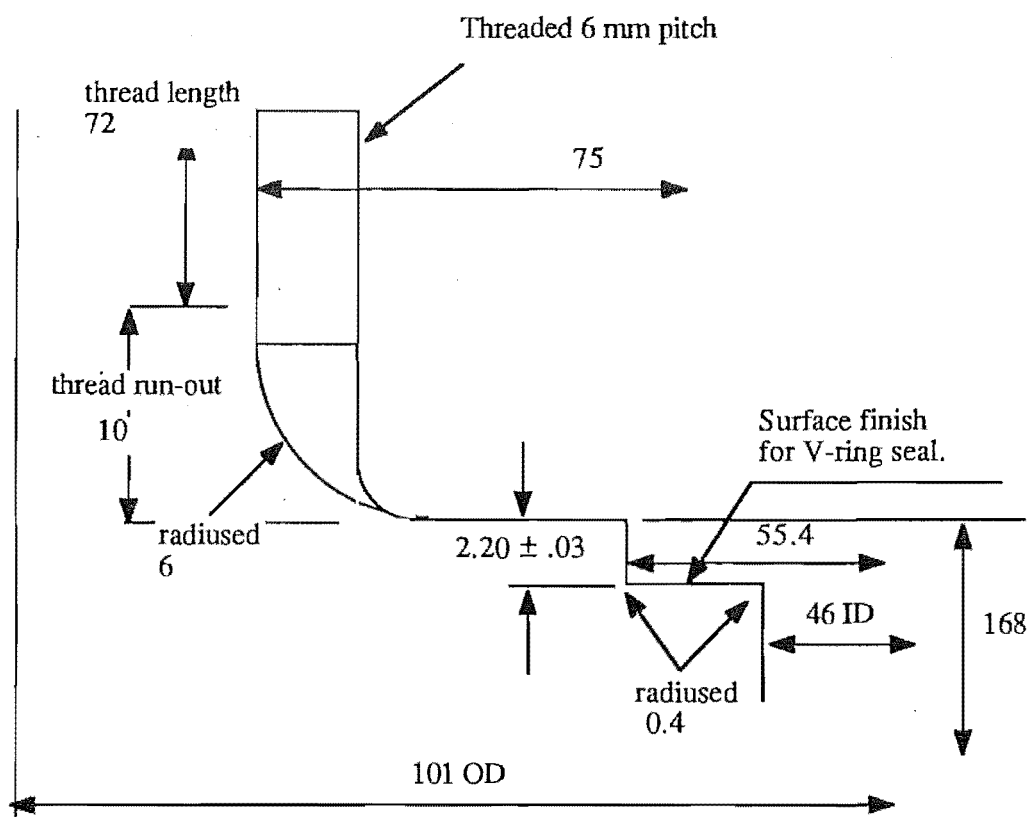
Workshop Drawing of the 700 Bar Cell. Thread and Gasket Details
